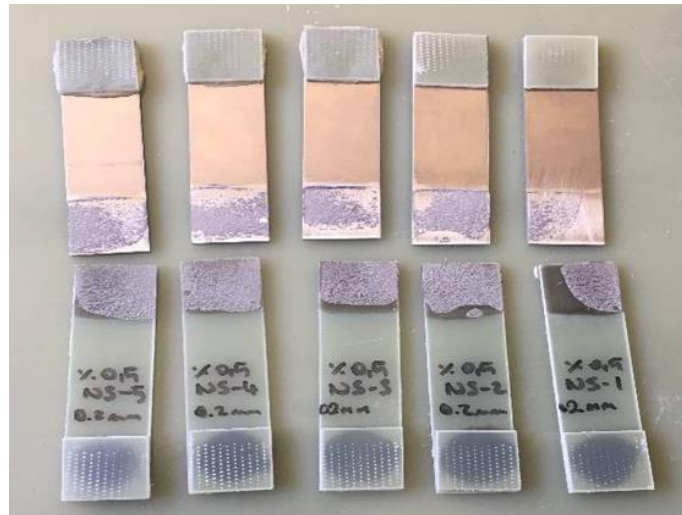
Appearance of bonding surfaces with pure Araldite bonded samples after tensile tests
